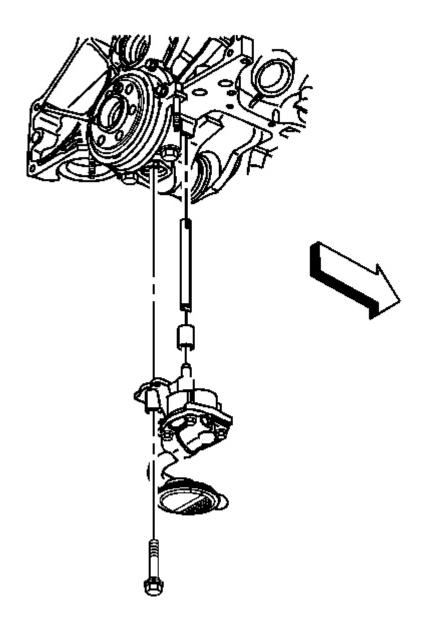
Oil Pump & Mounting Bolt Courtesy of GENERAL MOTORS CORP.
